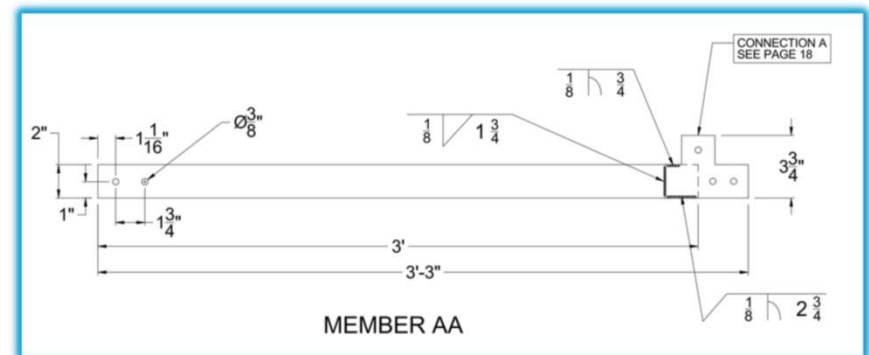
Shop Drawings – Horizontal Member Detail [11]
